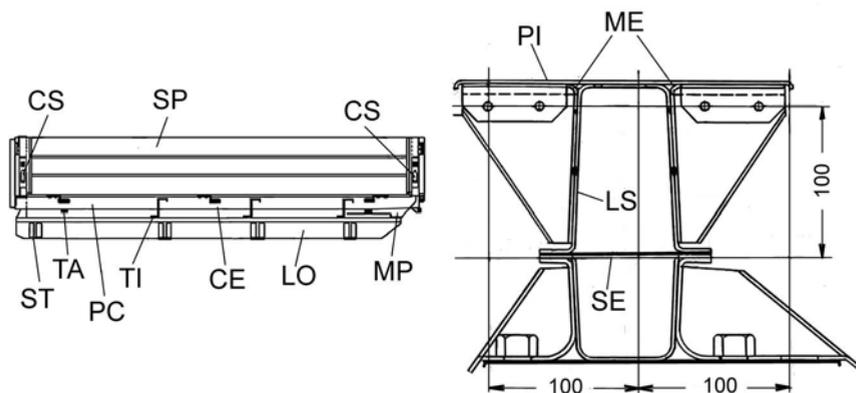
Map of bed walls supporting devices and typical section of rail and cross member intersection. SP) side wall; CS) wall lock; CE) wall hinge; LO) platform rail; TI) intermediate cross member; PC) frame; TA) wall stop bott; ST) outer brace for platform fitting; PI) cantilever brace, one side zinc coated (cantilever side); ME) cantilever, one side zinc coated (interface with rail and brace); LS) upper rail, inner side zinc coated; SE) diaphragm between rails, two sides zinc coated.
